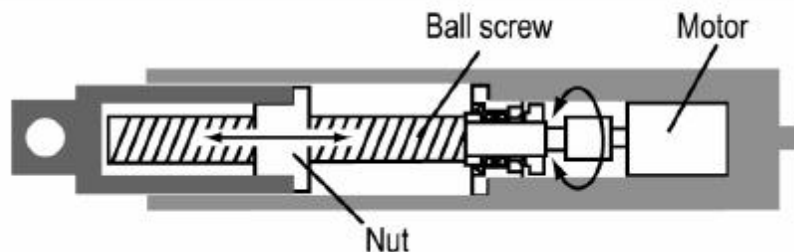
Electromagnetic (EM) damper using ball screw and nut
